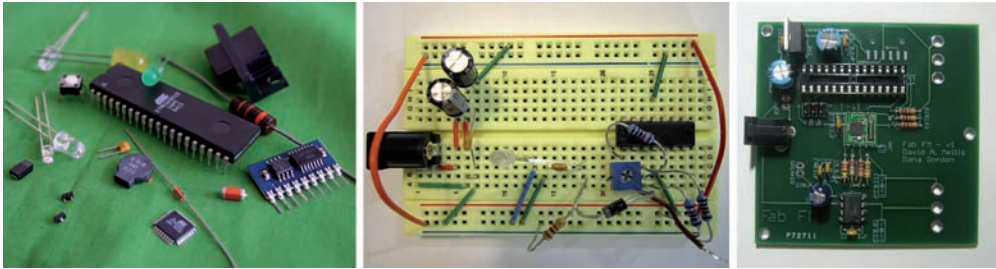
From left to right: electronic components, a breadboard, and a printed circuit board (PCB).
